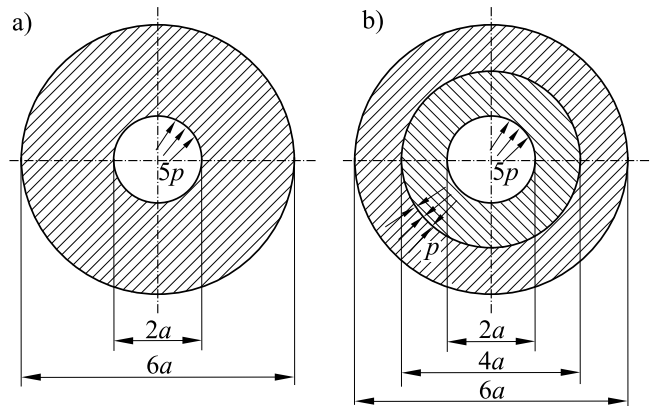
Example 2: cross-section of the single-wall a) and double-wall b) cylinder
